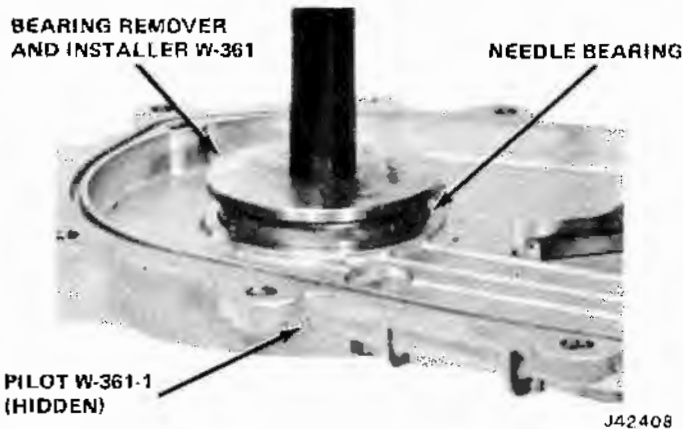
Installing Drive Sprocket Rear Needle Bearing
